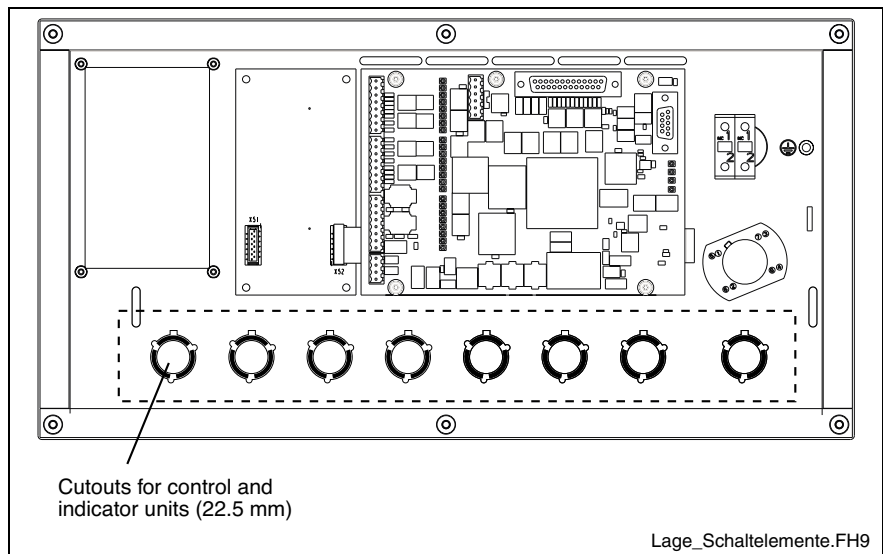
Cutout position of the 22.5 mm sized control and indicator units
